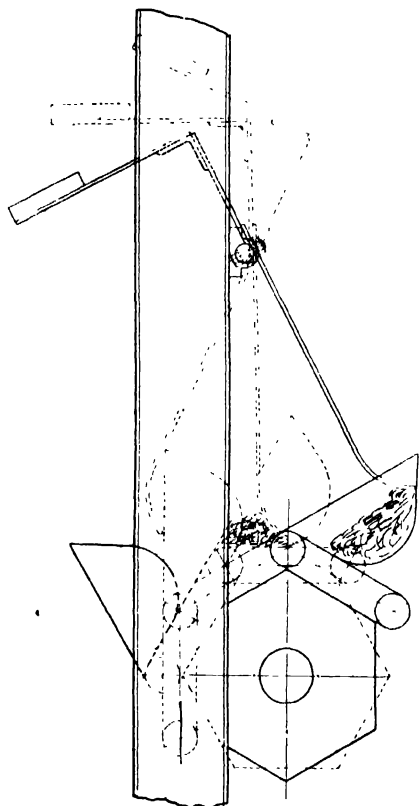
Arrangement of Elevator Bucket Emptying Device.
